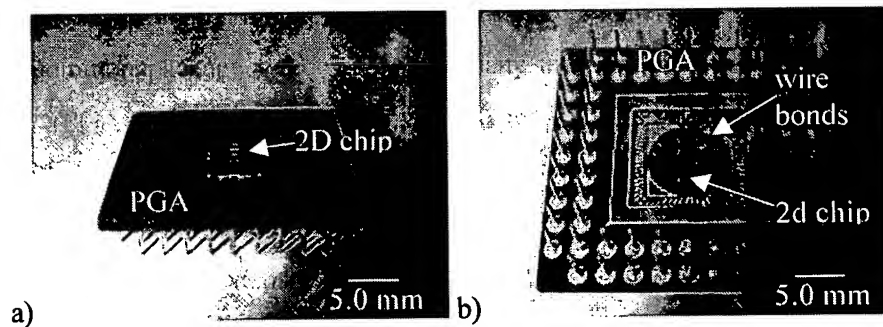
Optical image of a 2D chip in a PGA package viewed from a) the chip side and b) the pin side.
